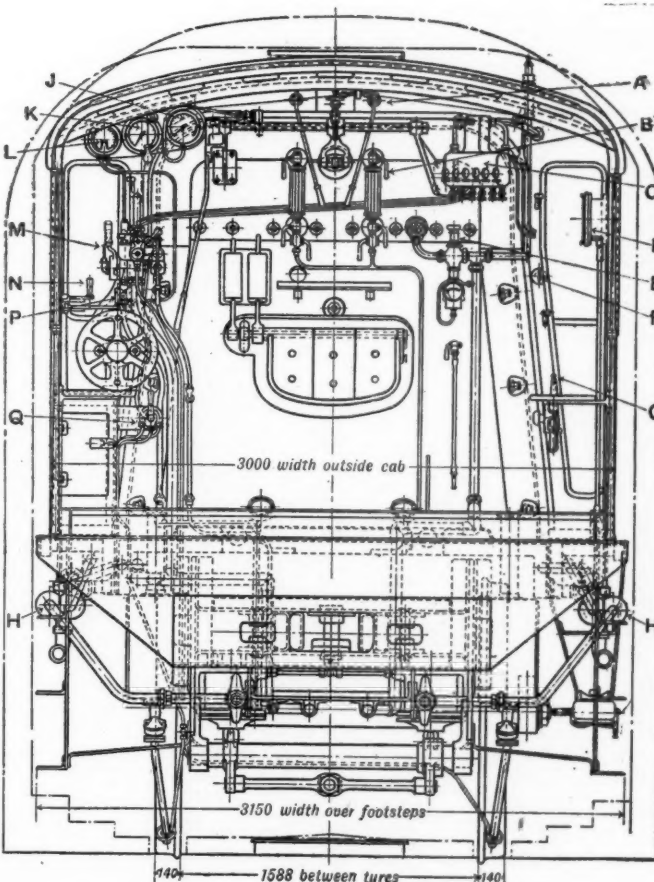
REAR VIEW AND ARRANGEMENT OF CAB
